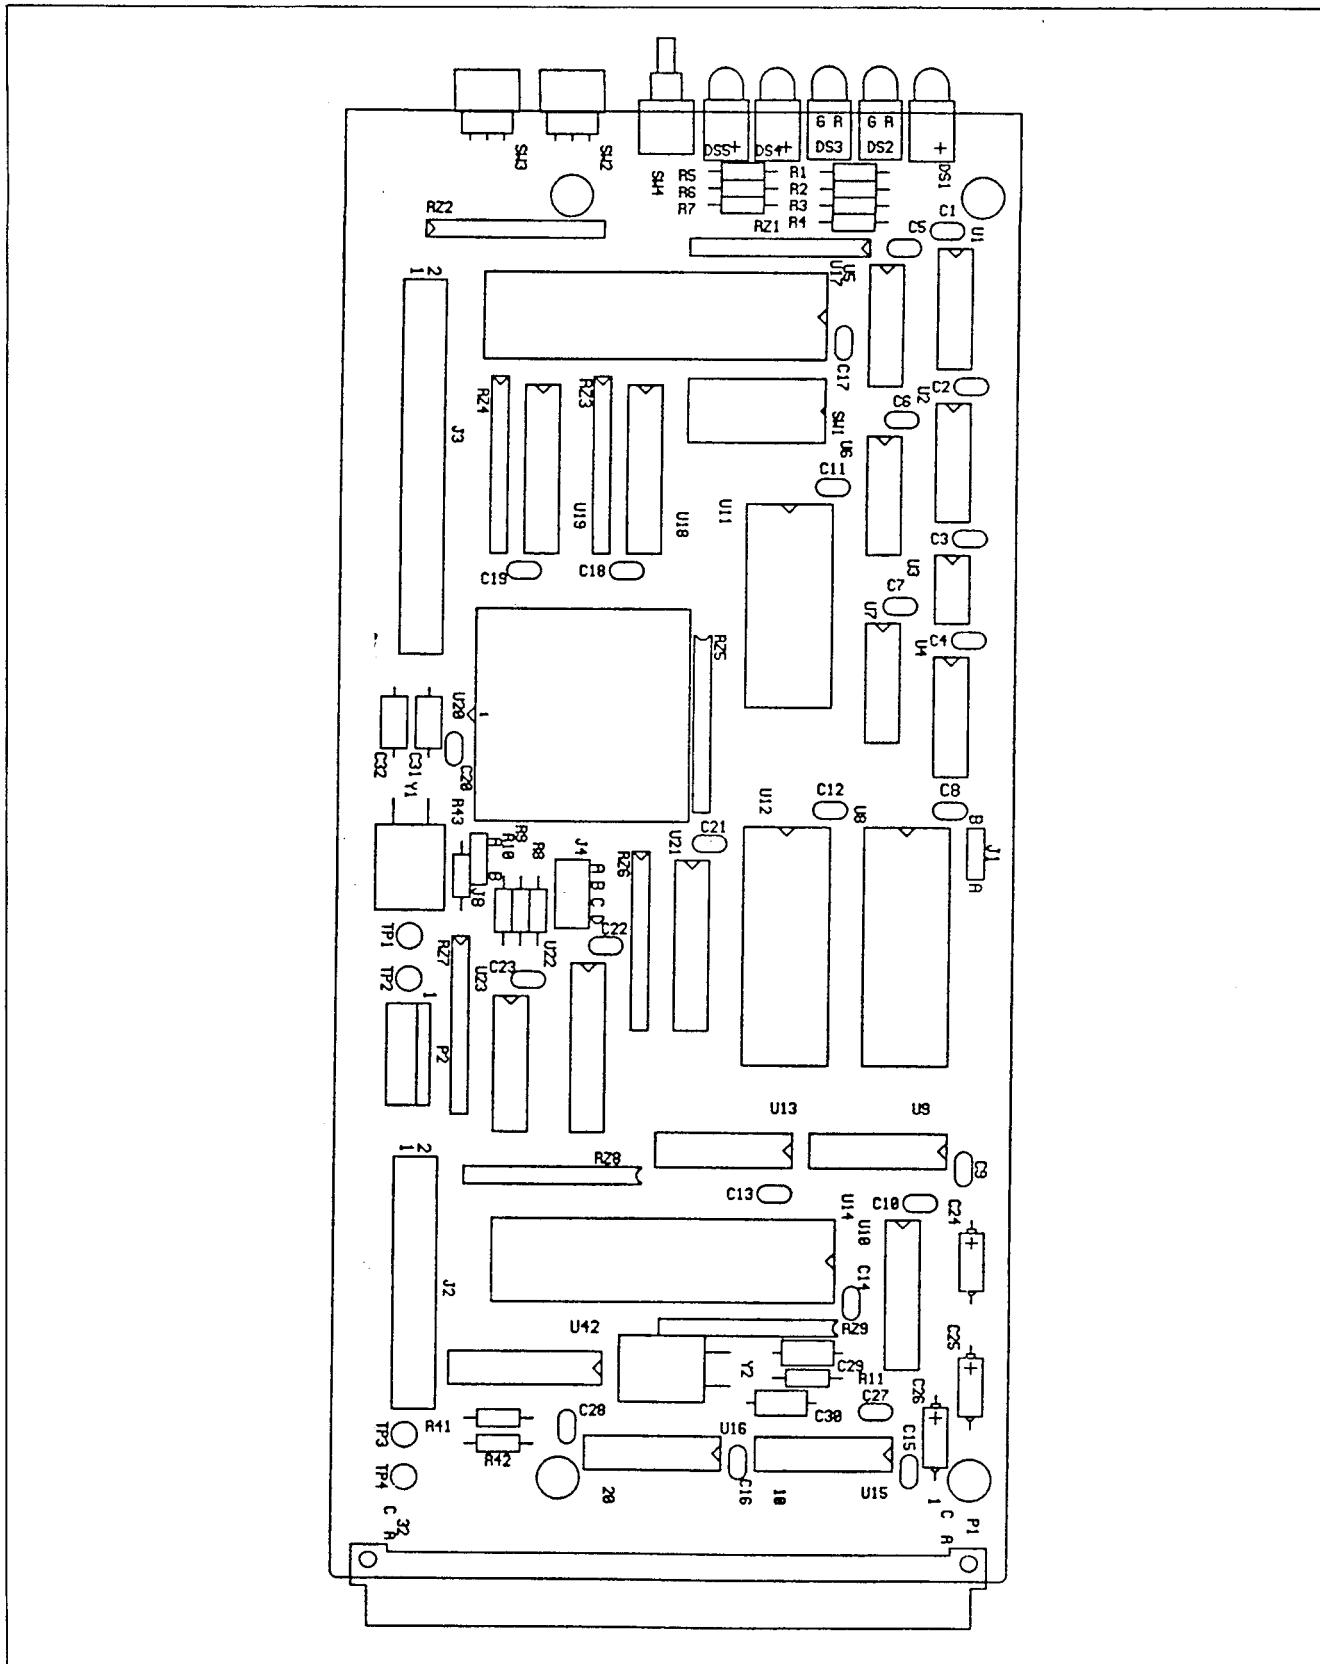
Component locator drawing, RFL 9720 CCM Communications And Control Module main circuit board (Assembly No. 104211; Drawing No. D-104208, Rev. B)
